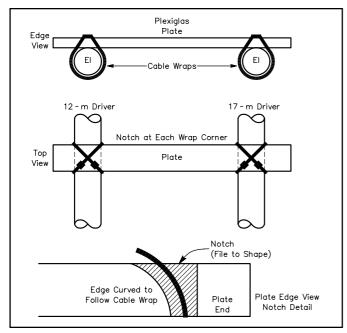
Details of a simple master-slave driver alignment plate with cable-wrap binders.
